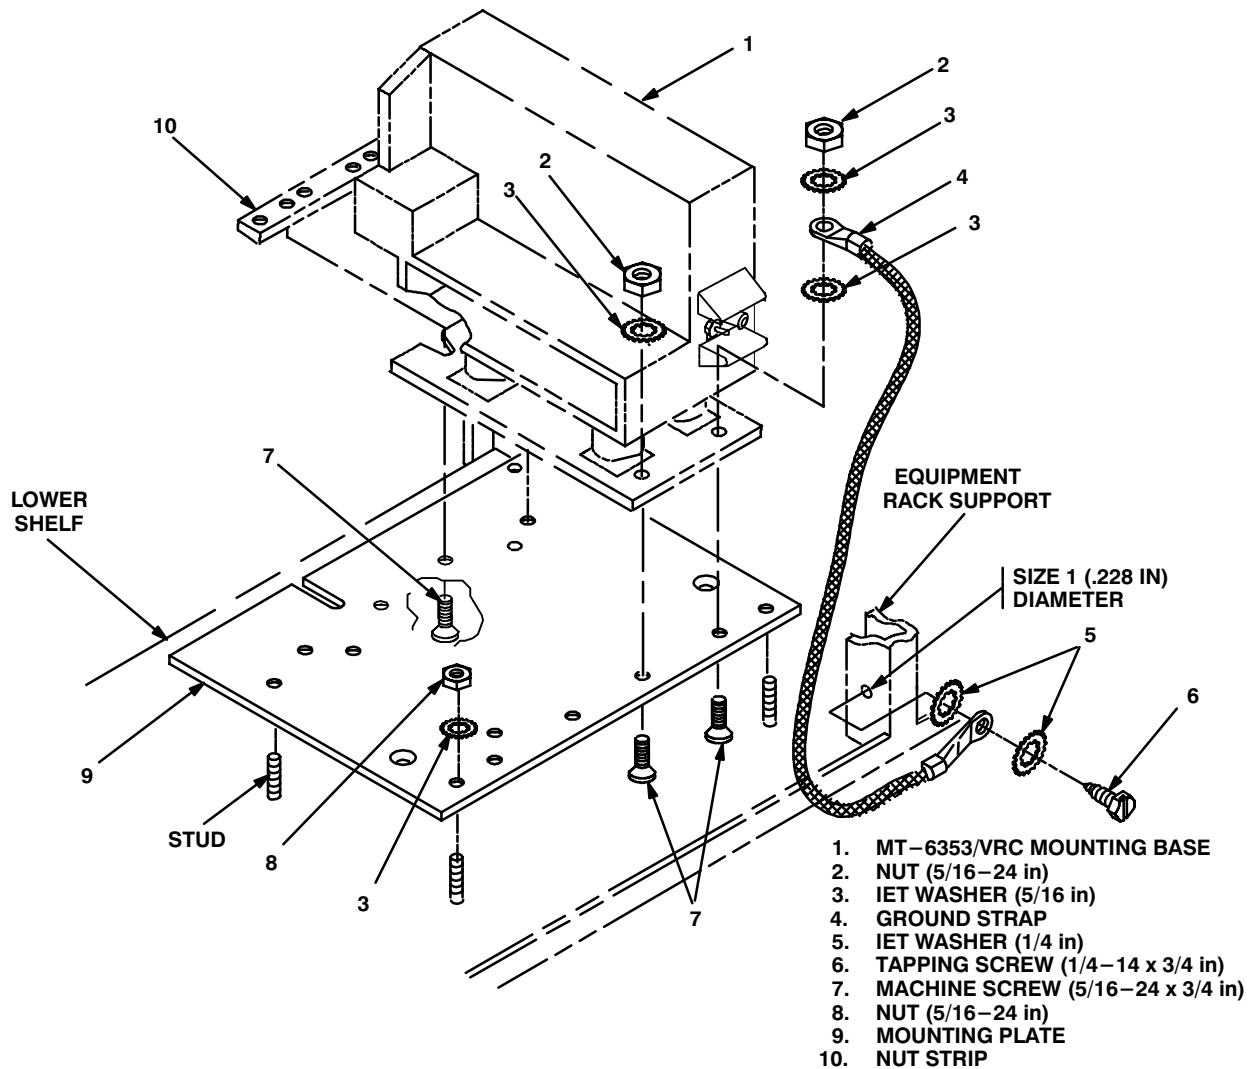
MT-6353/VRC Mounting Base Installation: Equipment Shelf
